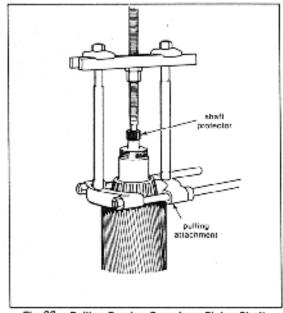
Pulling Bearing Cone from Pinion Shaft.
